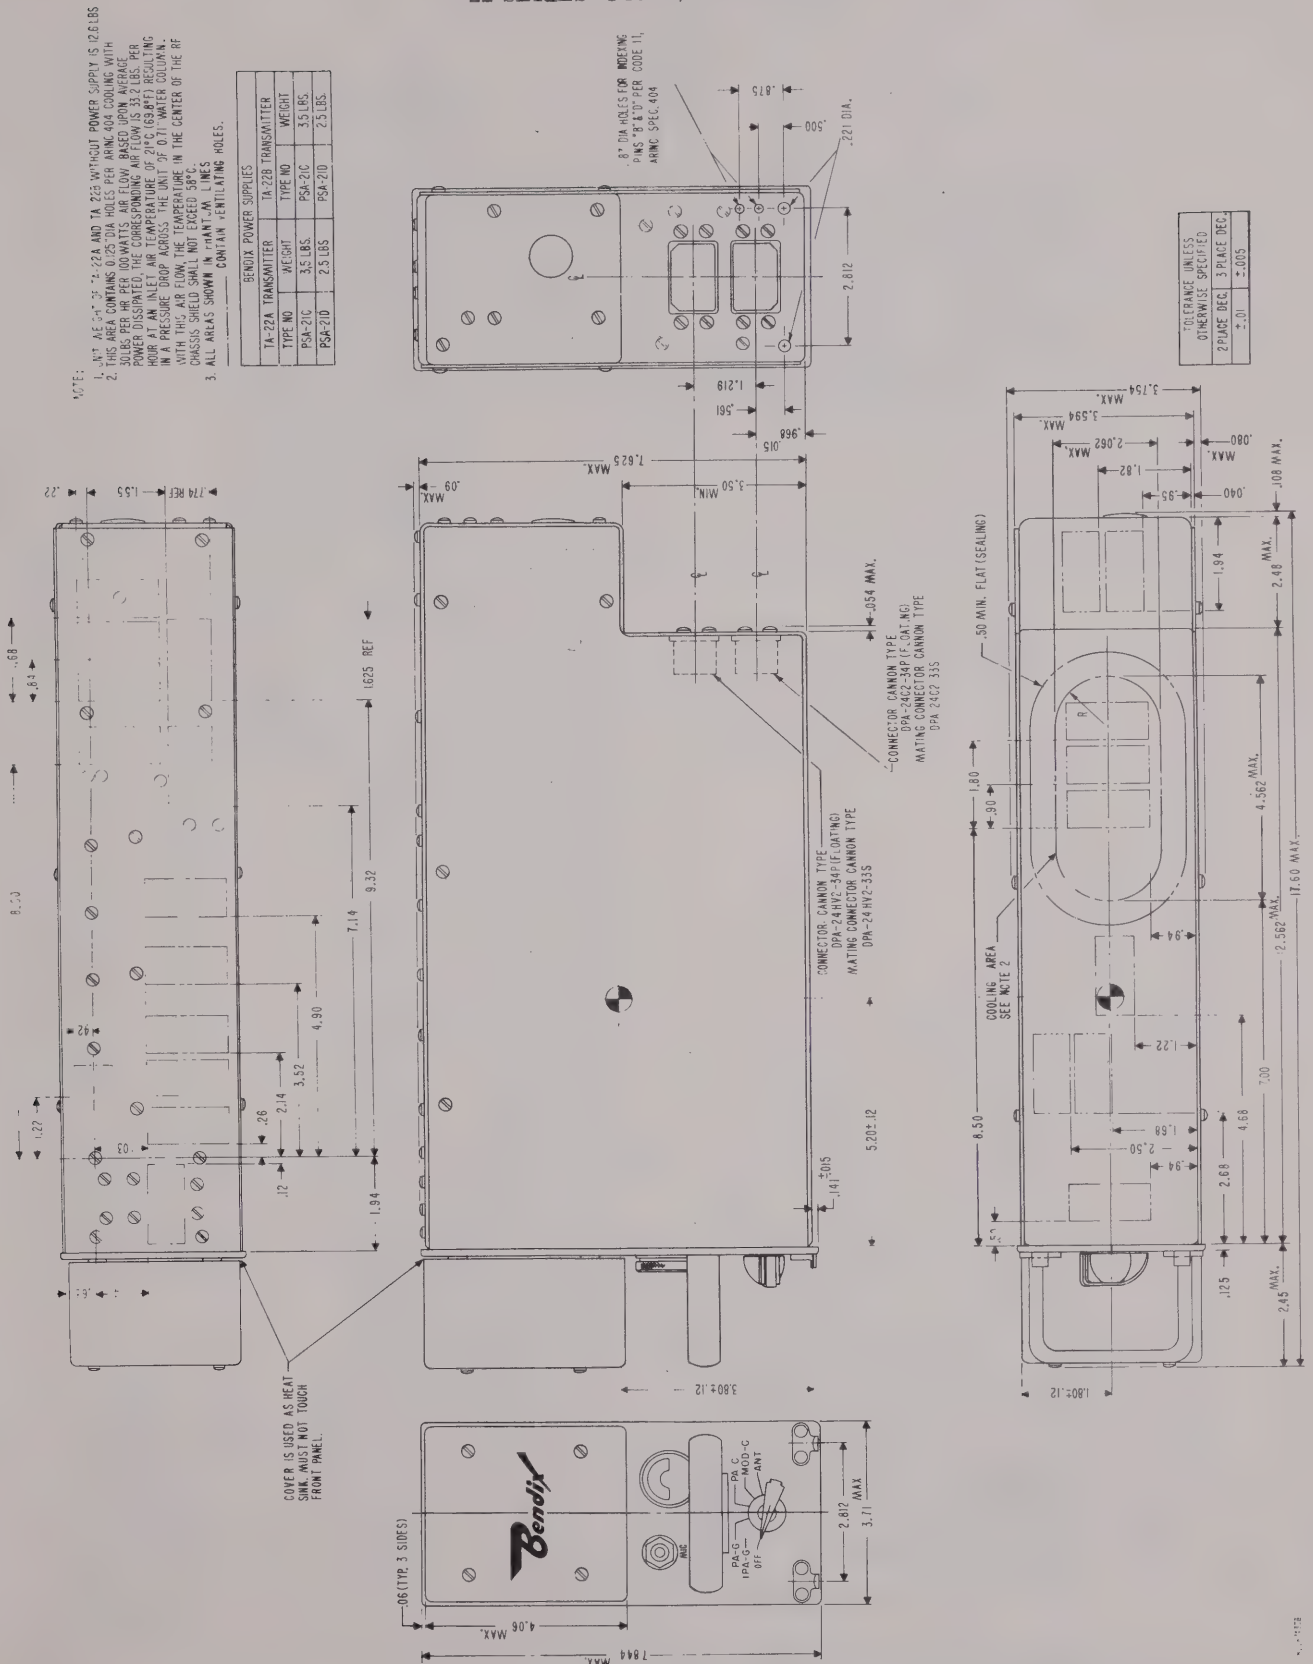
TA-22() VHF Transmitter, Outline Drawing
